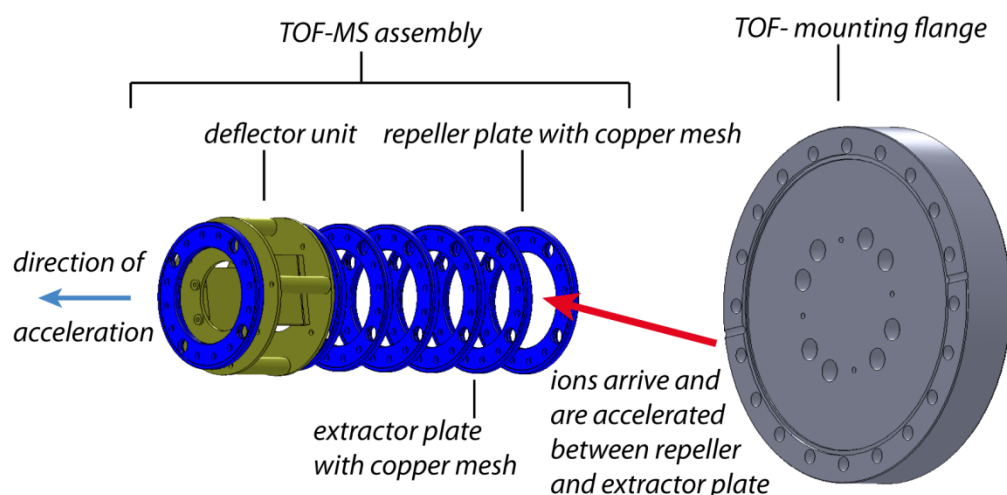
Overview of the TOF-MS assembly with implemented deflector unit and TOF-mounting flange. The ions arrive between the repeller and extractor meshes and are extracted in the direction of the detector.
